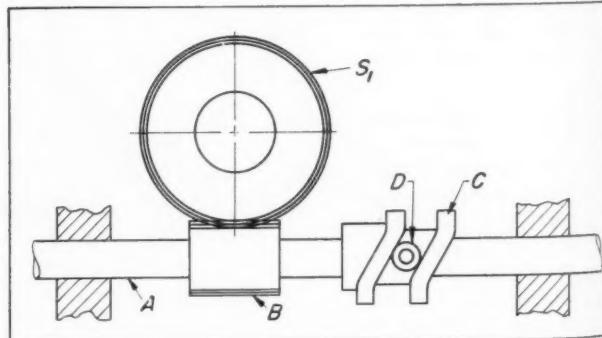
Above—Perspective view of screw and gear with cam control mechanism, which can provide any dwell
